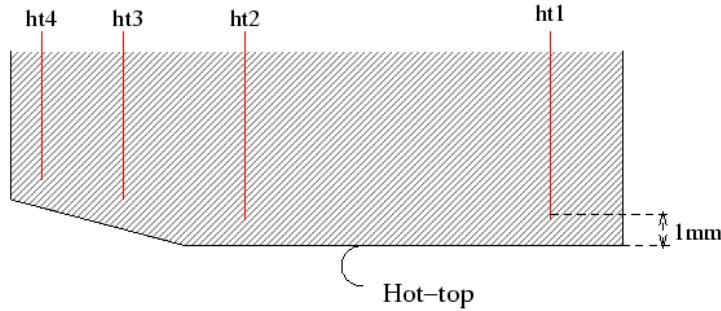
Placing of thermocouples in hot-top cross section (1mm from bottom surface).
